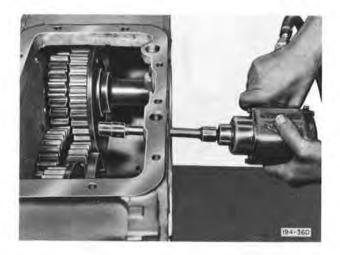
Removing Compound Countershaft Gear Retaining Thrust Washer Capscrews
